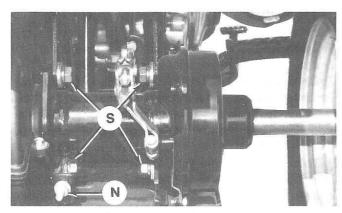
Loosen rear housing retaining screws (S) and rotate adjusting nut (N) to adjust chain tension.
